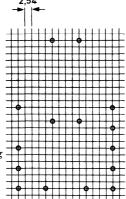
Hole pattern for mounting on a printed-wiring board (solder side)
